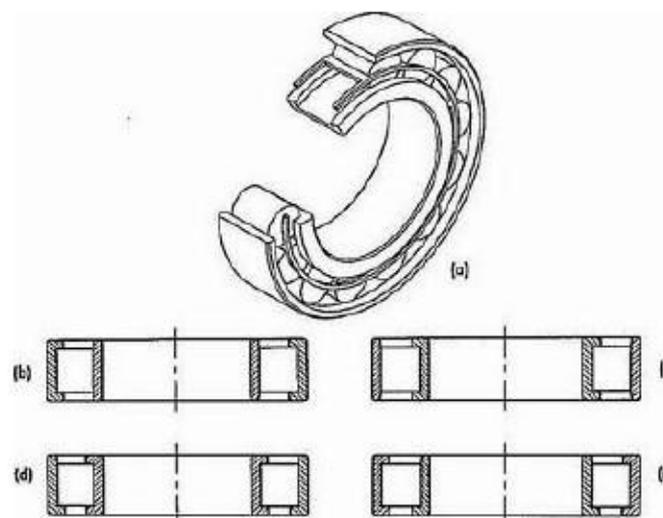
Roller Bearing (Different distribution of the bearings) [2]
